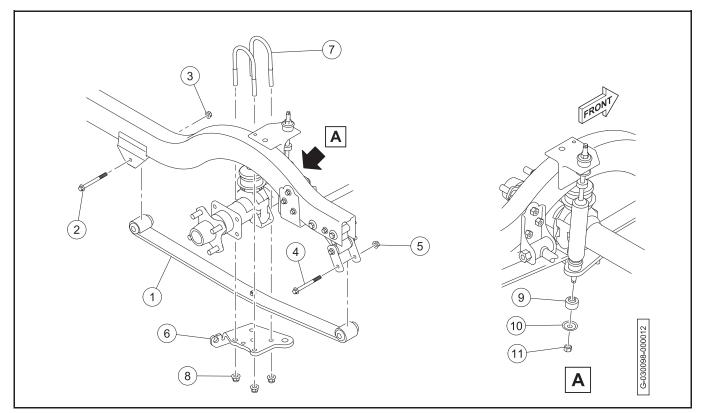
Leaf Spring Installation (Four-Passenger - Heavy Duty With Panhard)
